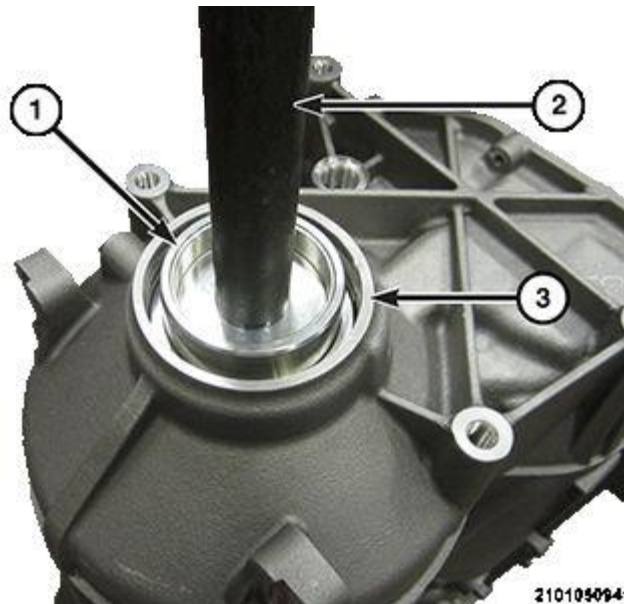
Installing Output Shaft Inner Needle Bearing & Oil Dam
